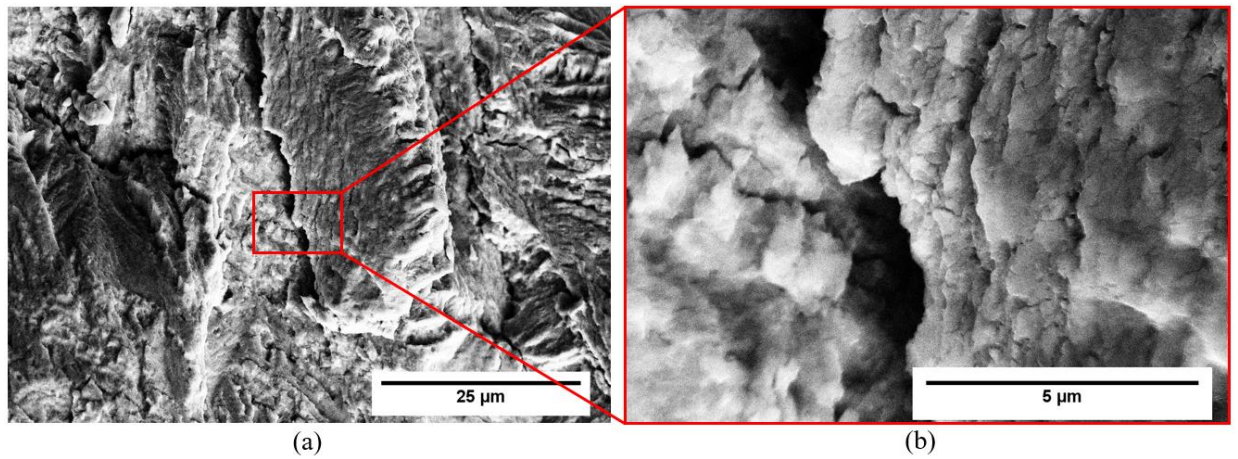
SEM image of 316L interlayer layer, a) fracture surface around 26 MPa√m, b) magnified view of secondary cracks.
